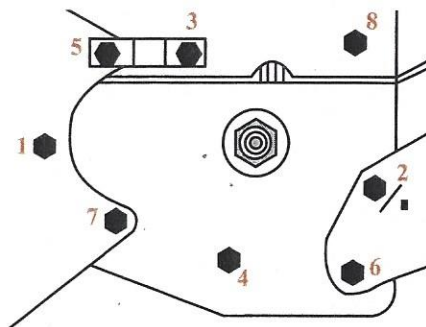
Bolts on an engine head should be tightened in a crisscross manner.
